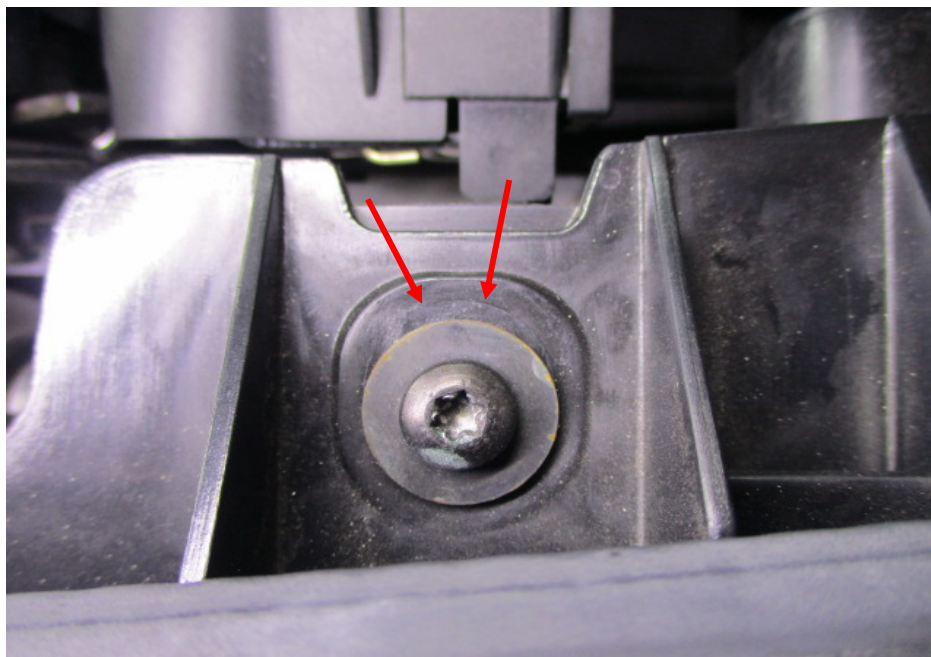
shows the other attaching screws for the Motor Car's front bumper. The circular imprint mark that was seen surrounding the washer for the attaching screw at the right side of the Motor Car's front bumper (refer to photograph 19 above) was similarly seen (arrowed) surrounding the washers for the other attaching screws.
